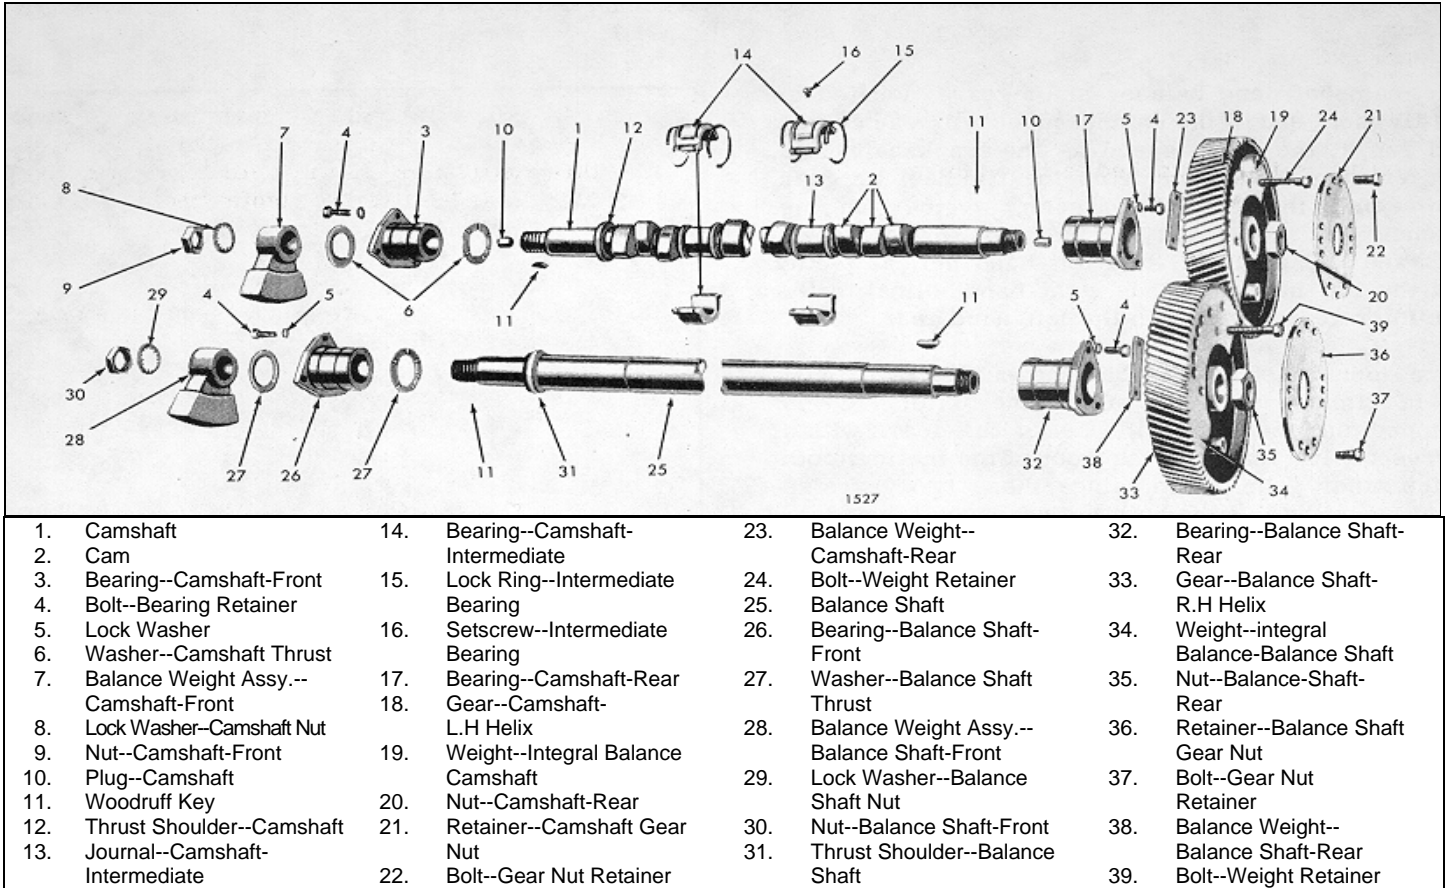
Typical Camshaft and Balance Shaft Details and Relative Location of Parts
